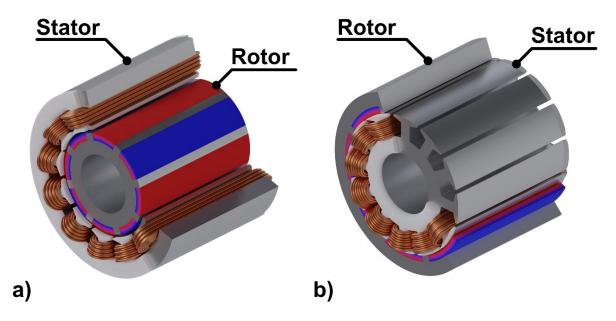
How the stator and rotor relate in an in-runner machine a) and an out-runner machine b) respectively, here illustrated using sectioned permanent magnet synchronous machines.
